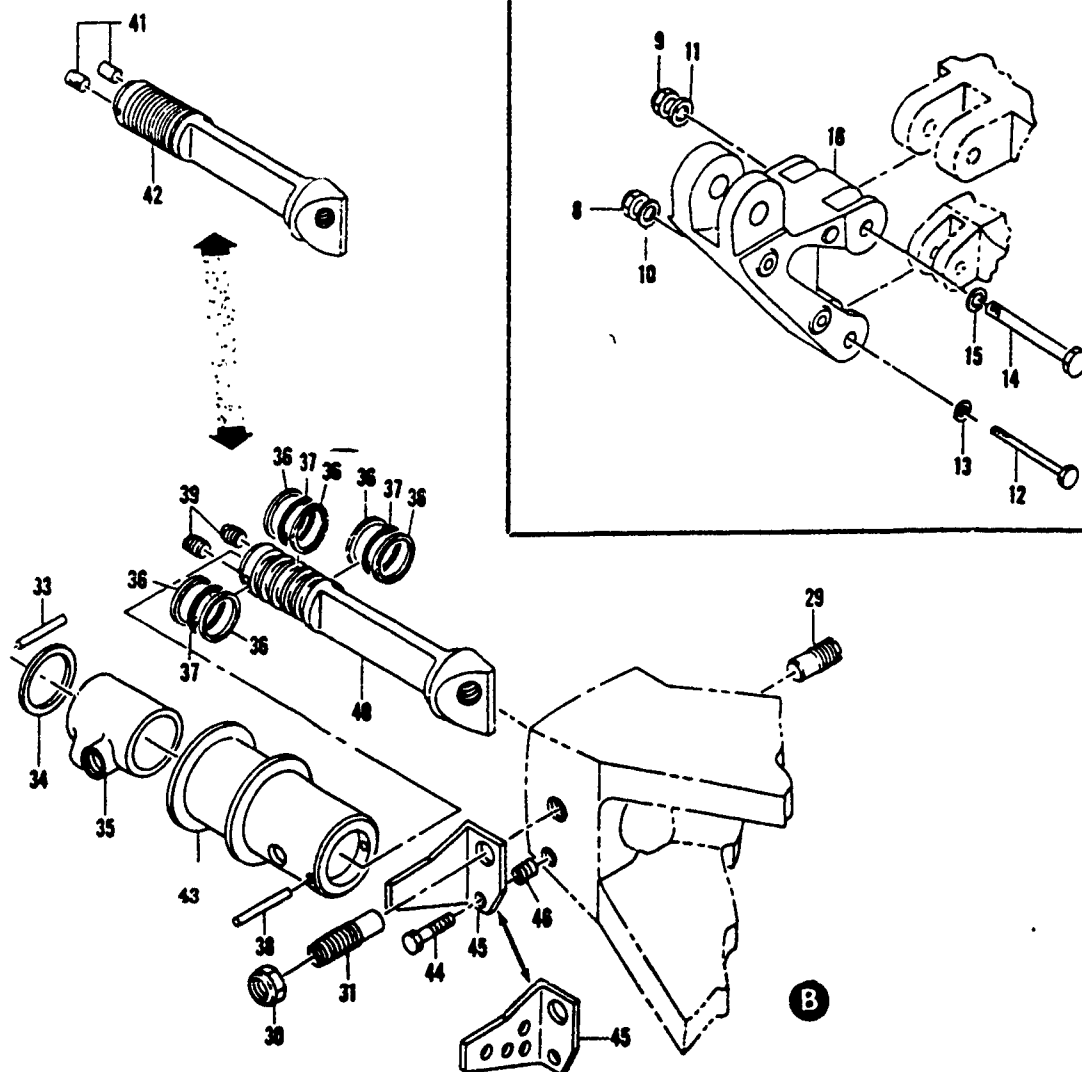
Nose Gear Outer Cylinder Assembly (Sheet 2 of 2)
